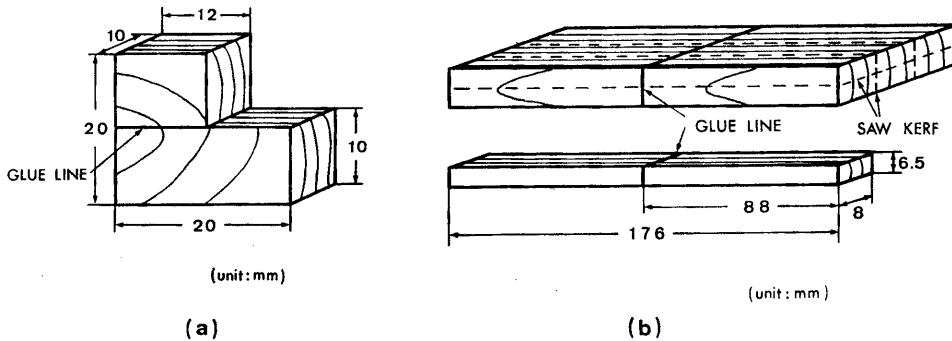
Shapes and dimensions of test specimens. (a); chair type shear specimen, (b); butt end jointed tensile specimen.
